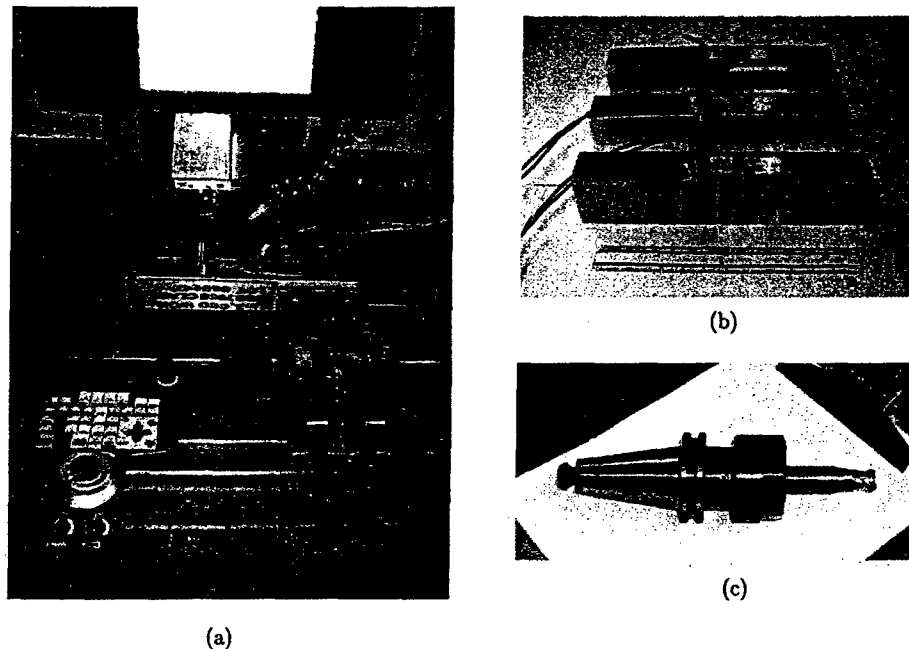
Experiments performed at Washington University. (a) The milling machine and controls (Cincinnati Milacron Sabre machining Centre). (b) Instrumented specimens. (c) The milling tool: 3/4 inch end mill (two flutes) corner radius: 0.120 inches (3.05 mm).
